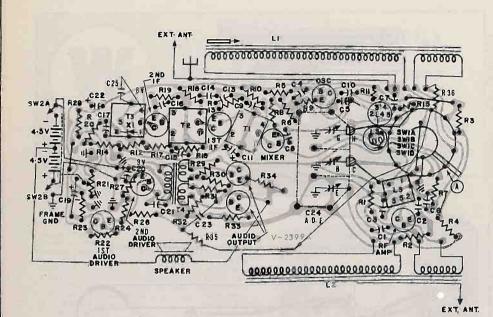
Bottom view of printed circuit chassis, showing components symbolically.
